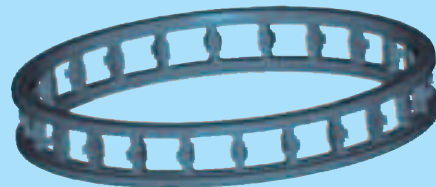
TP cage for ultra high-speed single row cylindrical roller bearings
